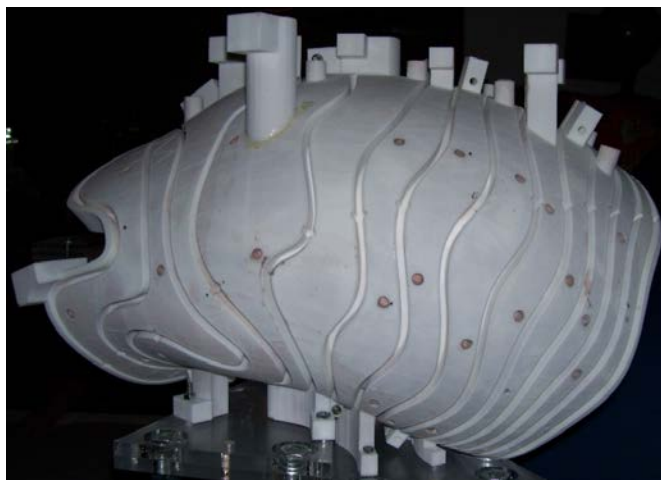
Coil frame, combination of 3D printing and casting.
